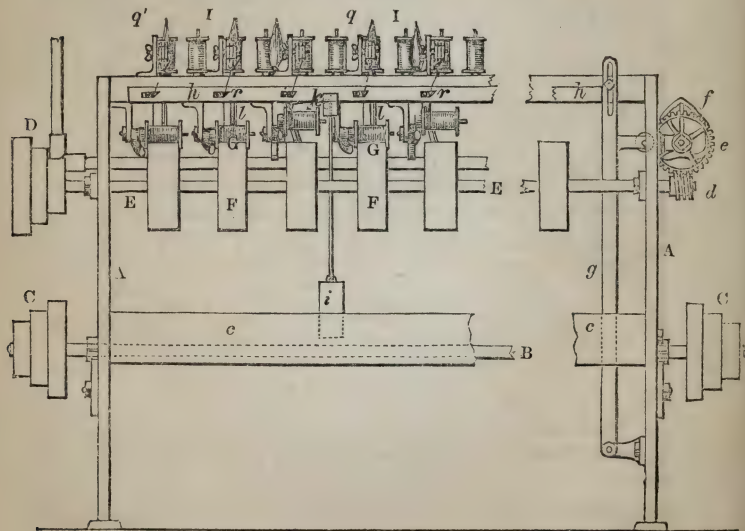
Thread Singeing or Gassing Machine. Front View. Scale, three-fourths of an inch to the foot.
